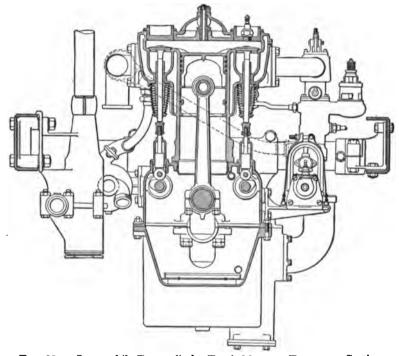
Locomobile Four-cylinder Truck Motor — Transverse Section.
